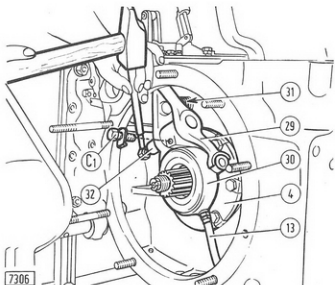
Removing the Steering Clutch Sleeve Fork Pivot Pin using Puller Screw and Punch
